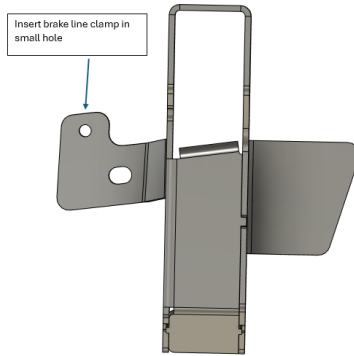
Insert Brake Line Clamp into small hole on Bracket
